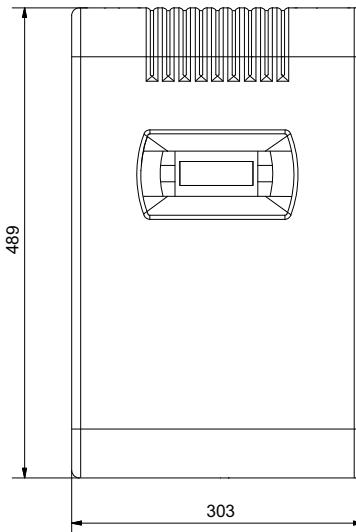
Dimensions of the wall-mounted heat pump manager (heating)
